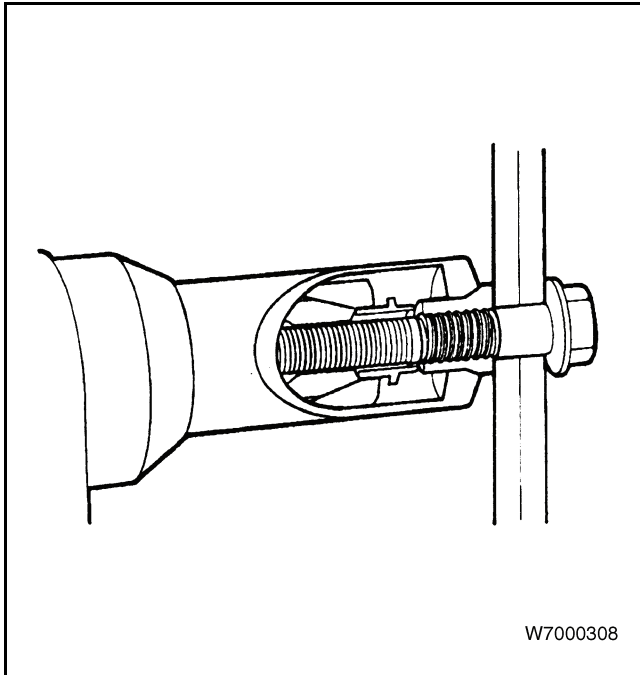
Swaging Completed (HUCK-FIT<sup>®</sup> Fastener Shown)
